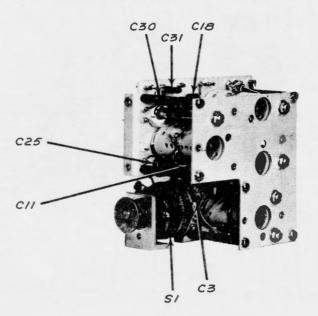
Detector and Bfo (Subassembly) A1A20A3, Parts Location and Test Points
